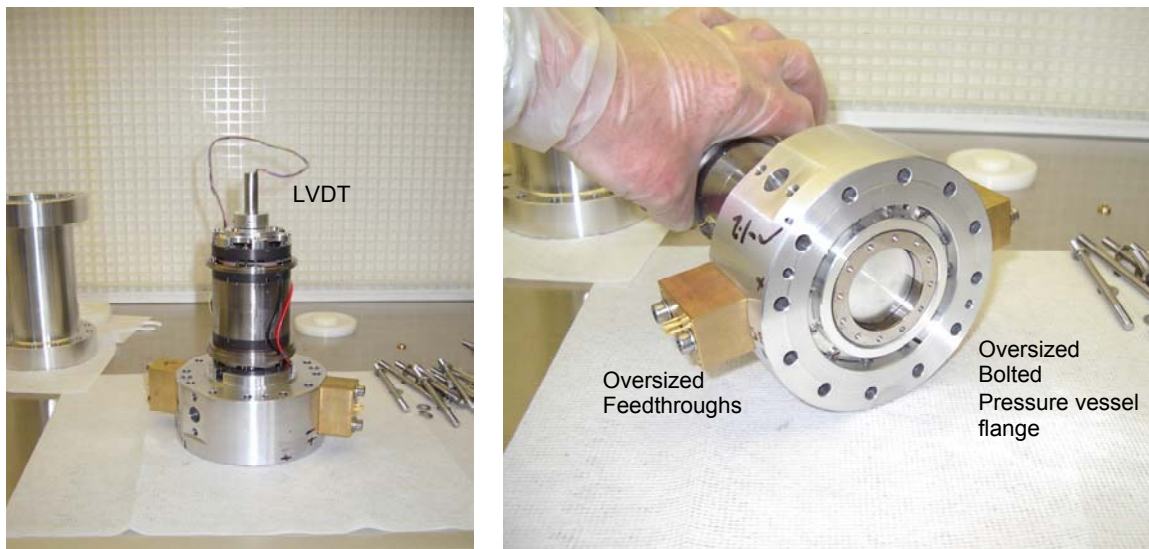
Alternator during assembly showing the LVDT sensor, large pistons, oversized flanges, and feedthroughs
